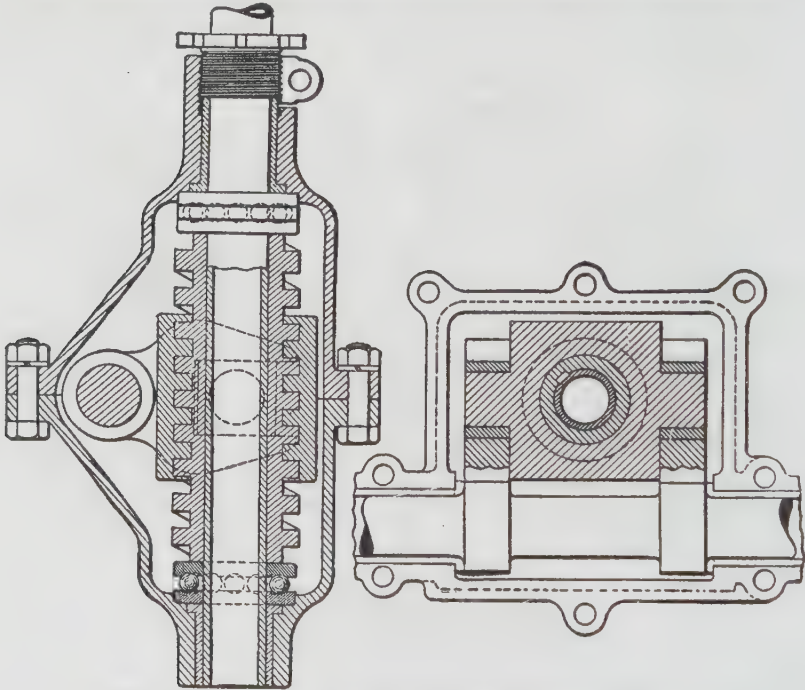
SCREW AND NUT TYPE STEERING GEAR.
